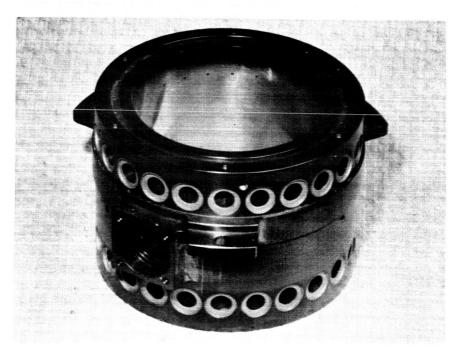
GYRO SLEEVE AFTER FINISH MACHINING
